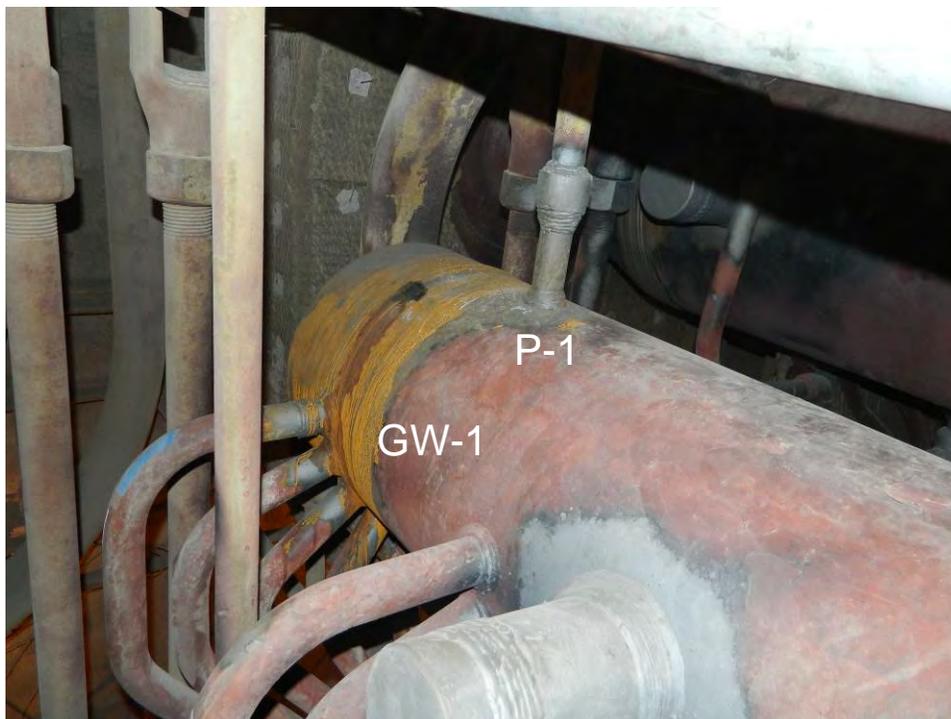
Photographs of girth weld No. GW-1 and penetration Nos. P-1 and P-3 on the Finishing Superheater Inlet header.
